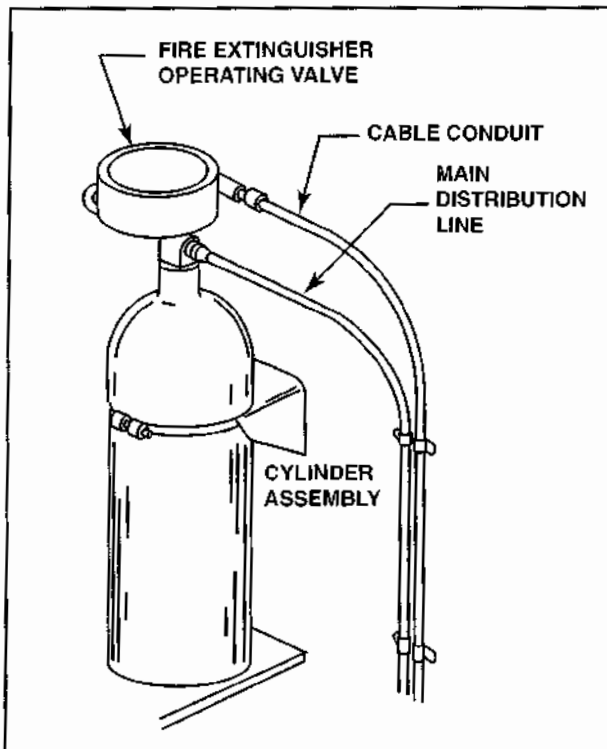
A fire extinguishing system that uses carbon dioxide as the extinguishing agent has a sturdy cylinder assembly mounted to the airframe and connected to a distribution line. A cockpit-controlled operating valve releases the carbon dioxide from the cylinder.
